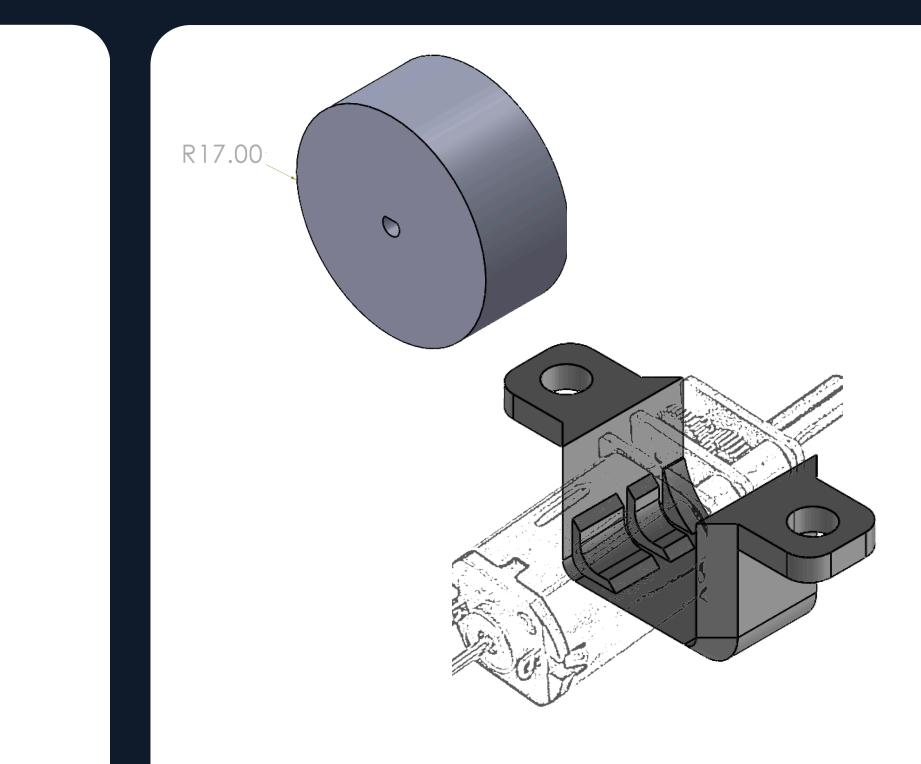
Custom Components. Isometric CAD views of the custom motor mounts and wheels.
